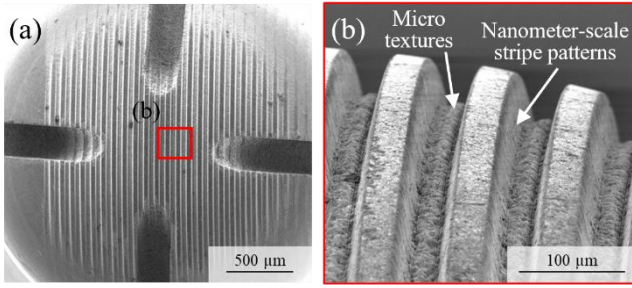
SEM images of (a) overall view of a laser-grooved PCD tool; (b) close-up view of the tool tip.
